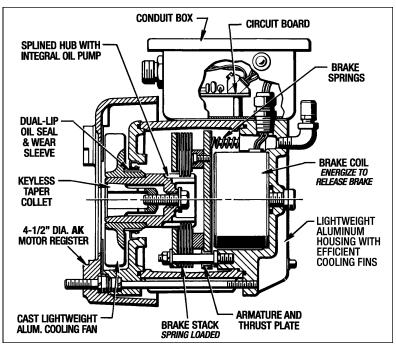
MagnaShear MSB2 Motor Brake Cross Section
